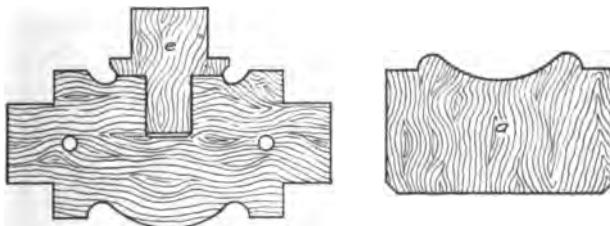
Sectional View of Pattern and Template for Blow Valve
